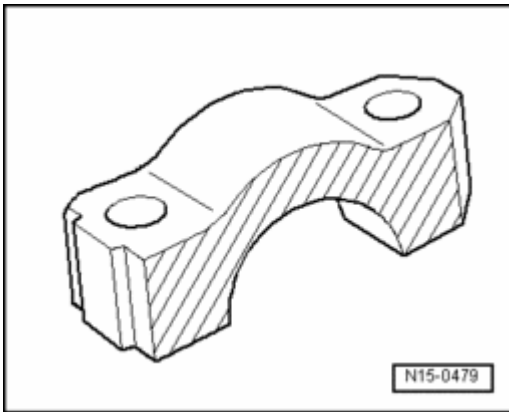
Identifying Contact Surfaces Of Bearing Caps 7 And 8
